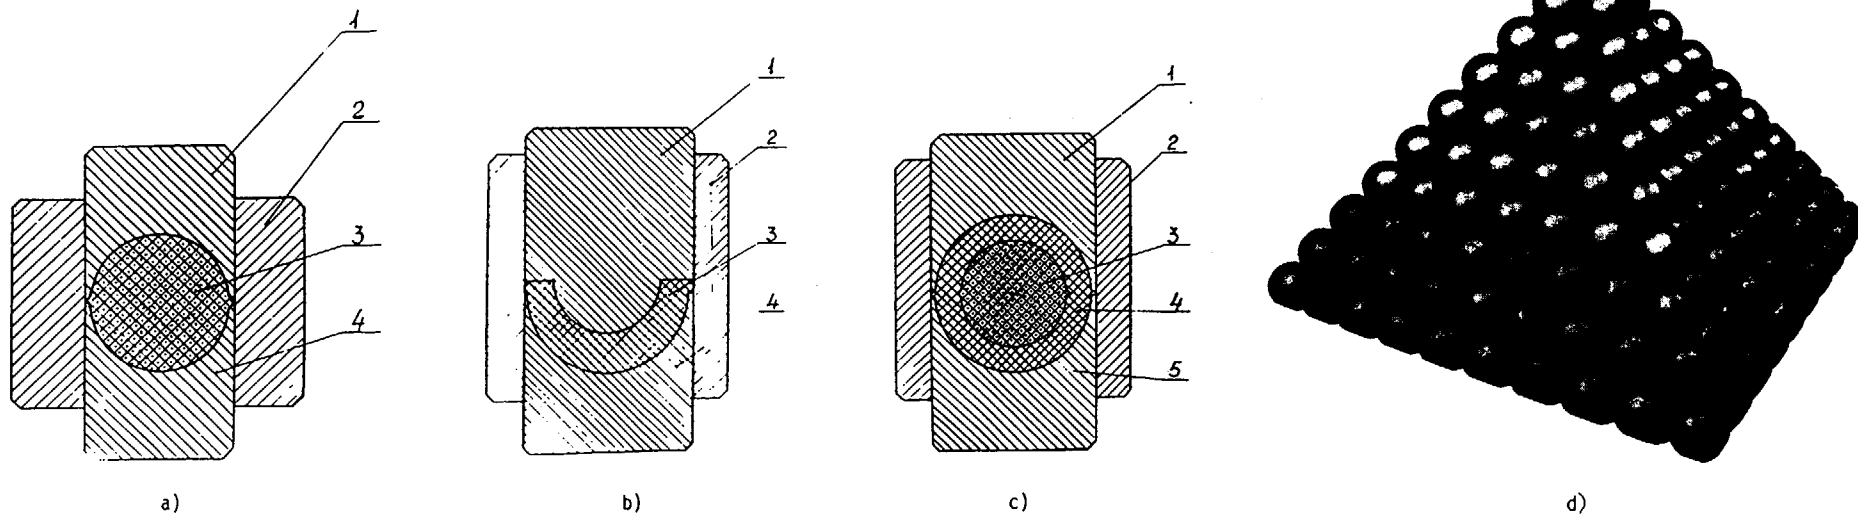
Diagram of molding the billets of a core (a), shell (b) and fuel element in assembly (c); appearance of GSP fuel elements (d).
